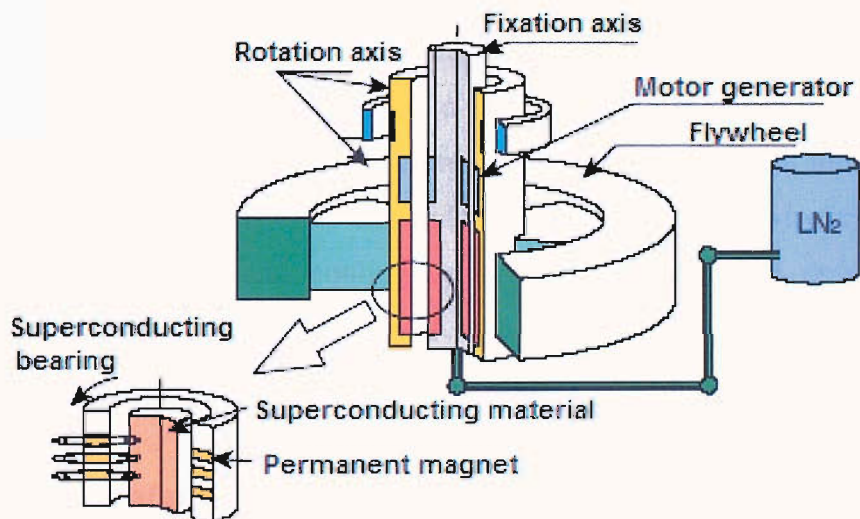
Flywheel system and details of superconducting magnetic bearing assembly
